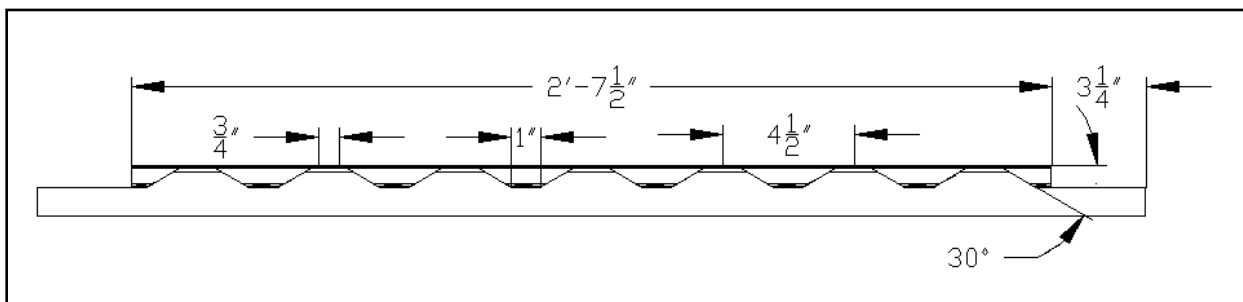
c: Side Profile schematic of the final mold design.
